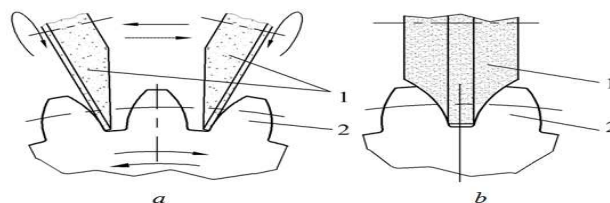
Teeth Grinding Using (a) Breaking-in and (b) Shape Copy Methods; 1 - Grinding Disc; 2 - Treated Teeth
